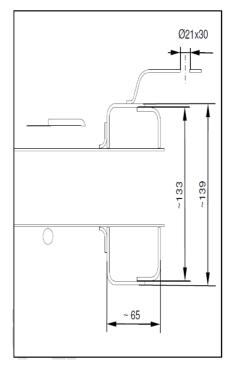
Section R-R (Amarok SC/DC)
